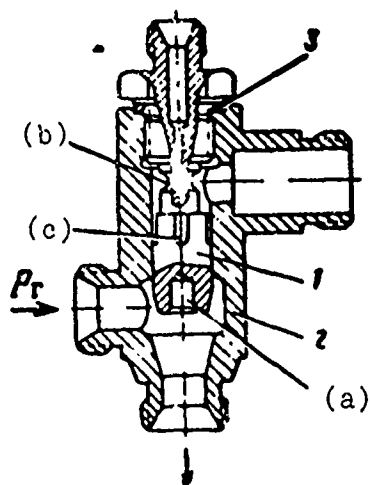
A normally opened direct-action explosive valve: 1 - valve; 2 - housing; 3 - separator; a - bore; b - valve neck; c - milling (groove).
